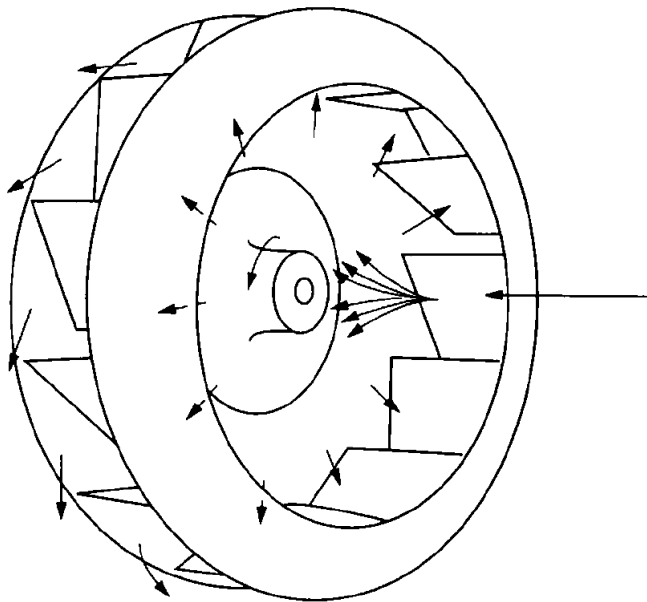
Centrifugal blower wheels with backward-inclined (BI) blades welded to back plate and shroud.
